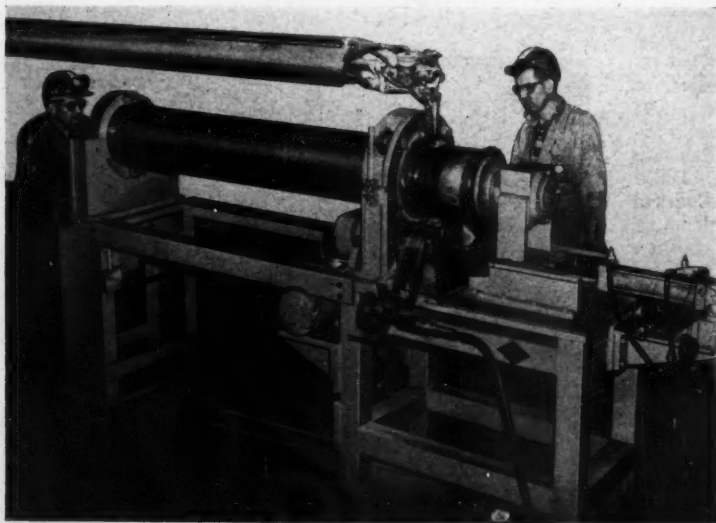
At this set-up, the pedestal section and formed head are welded to the motor cases by the submerged-arc process. Each weld is subjected to a 100 per cent X-ray inspection
